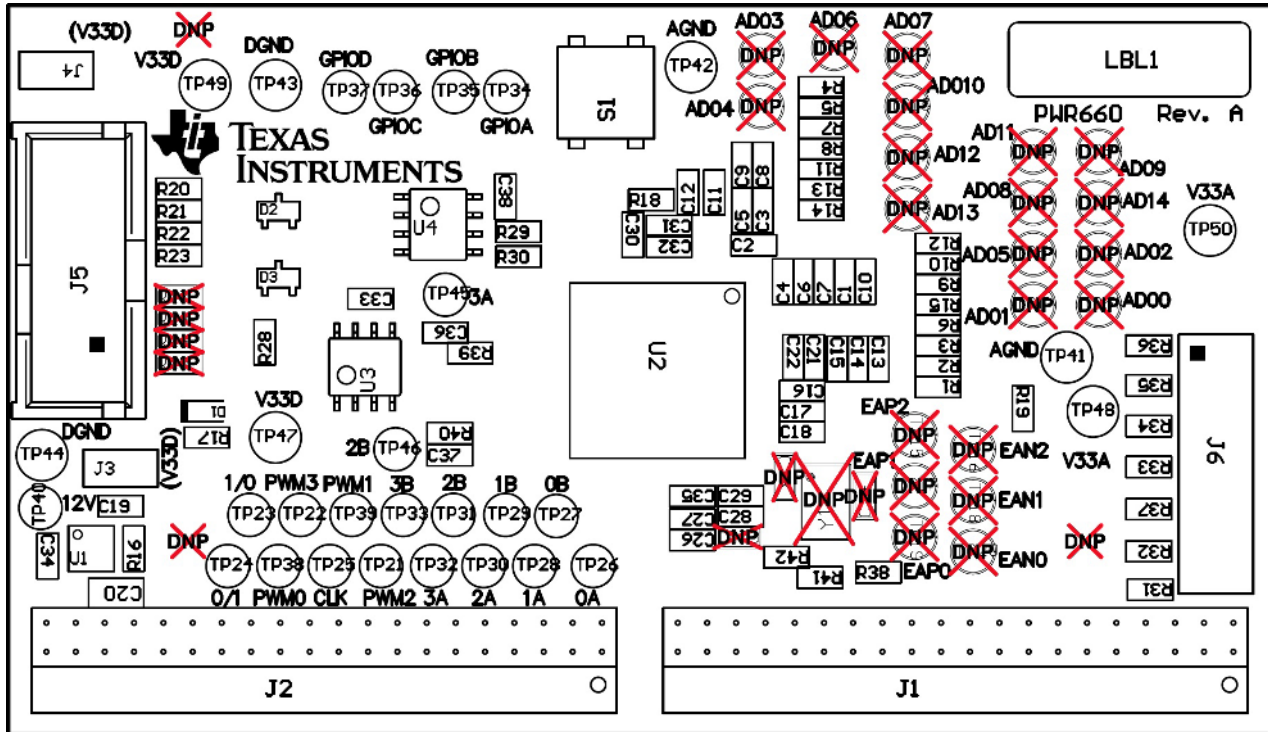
UCD3138A64EVM-660 Top Layer Assembly Drawing (Top View)
